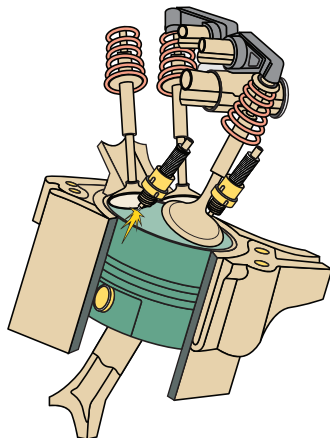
An engine with two spark plugs, two intake valves, and one exhaust valve for each cylinder.
